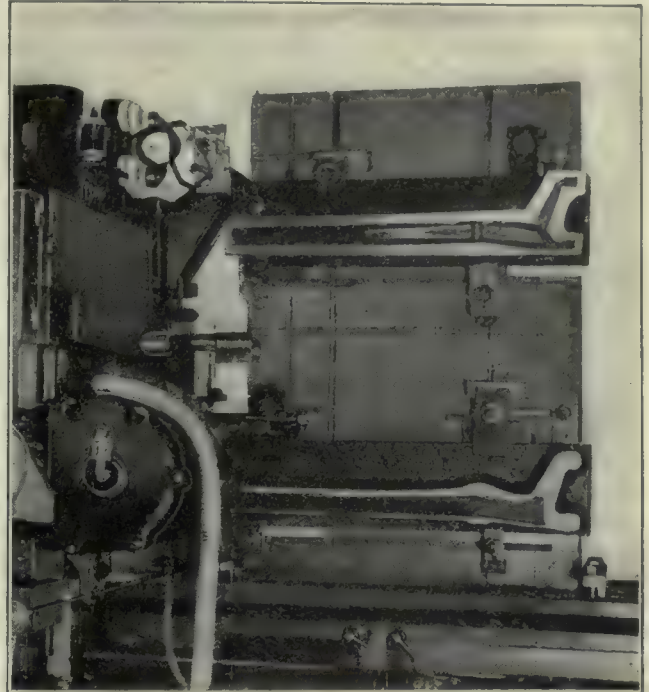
WORK AND MASTER ON KELLER TYPE F MACHINE
